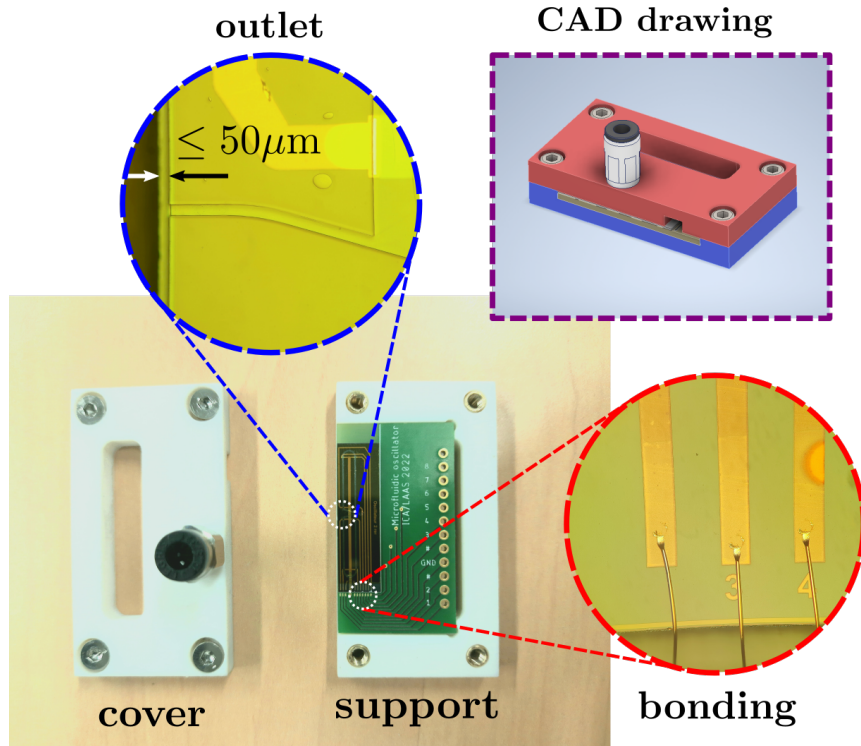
Chip/PCB/casing assembly with detailed views of the chip-to-PCB bonding wires (red) and of the diced edge of the wafer in front of the micro-oscillator's exit (blue) and the CAD drawing of the assembly (purple).
